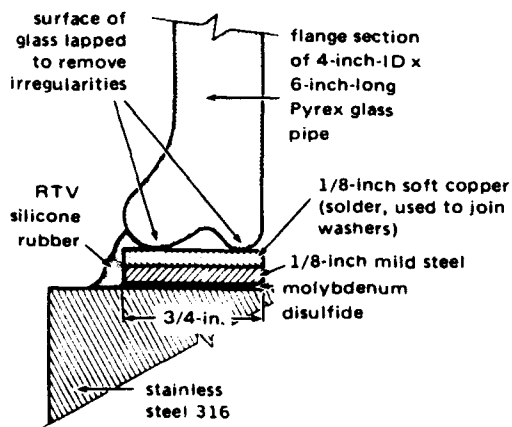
Experimental sealing and bearing system utilizing a composite copper-steel washer between the glass pipe end flange and the metal end-closure plate.
